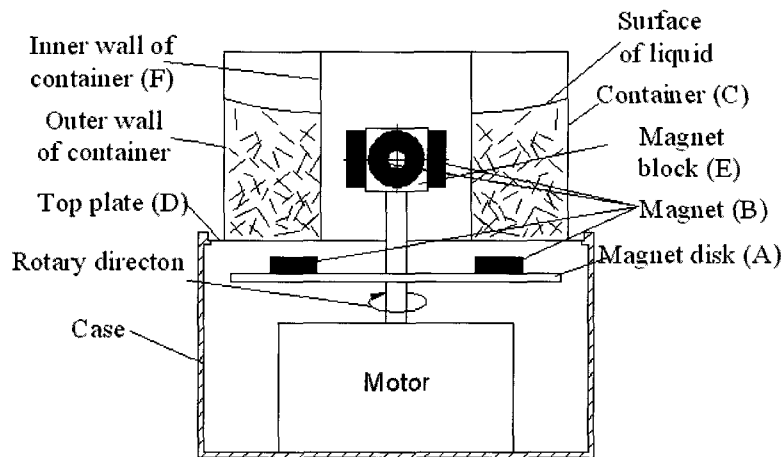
Magnetic barrel machine equipped with a three-dimensional magnet arrangement
